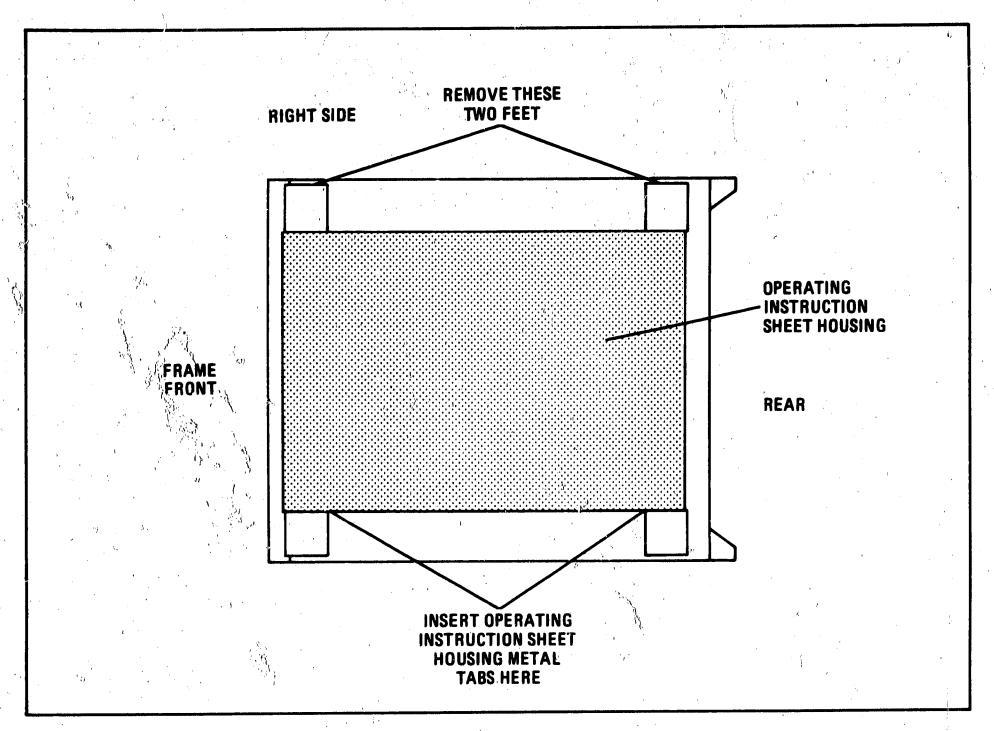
Changing 8505A Operating Instruction Sheet to Bottom of 8503B
